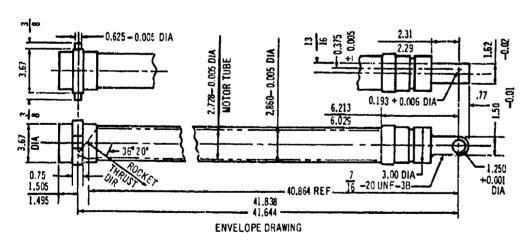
Frankford Arsenal M10 Rocket - Catapult
